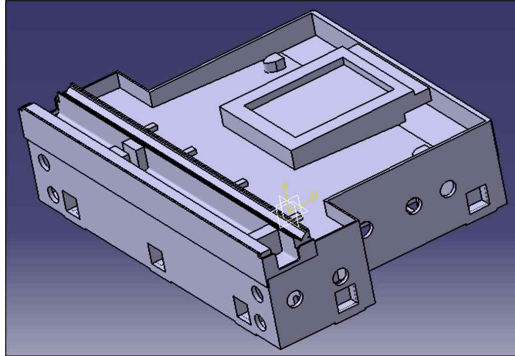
Multi Grinding Machine 3D Modeling using Catia V5R19
